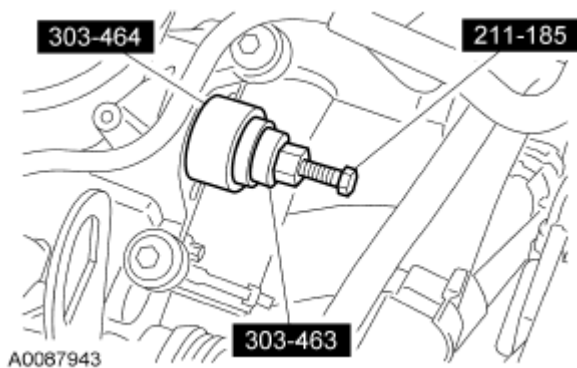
Installing Camshaft Oil Seal Using Special Tools (303-463, 303-464, 211-185)
